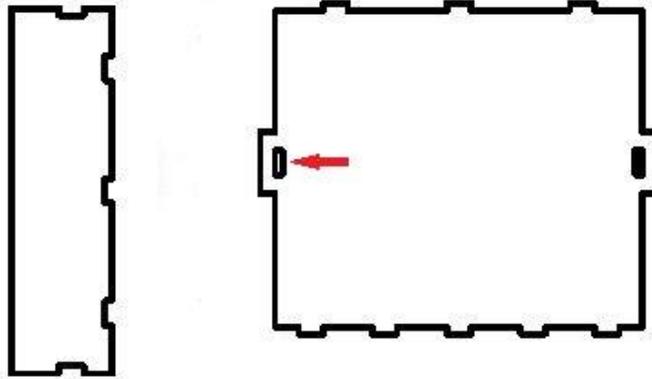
Two pieces with puzzle shaped connectors. Slits dependent on sheet metal thickness marked by arrow.
